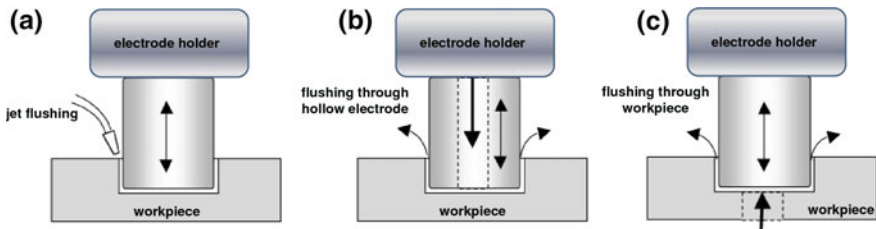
Schematic of a jet, b flushing through tube electrode and c flushing through workpiece in micro-EDM process
